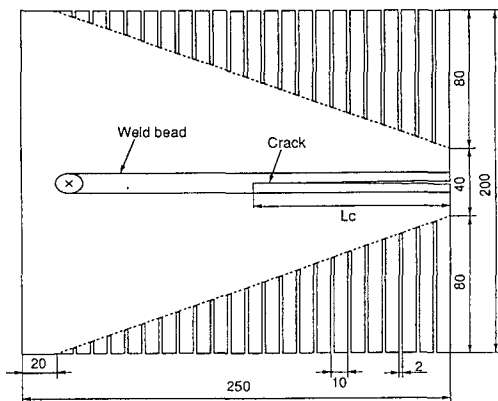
Shape and dimension of Modified Houldcroft type cracking test specimen.
